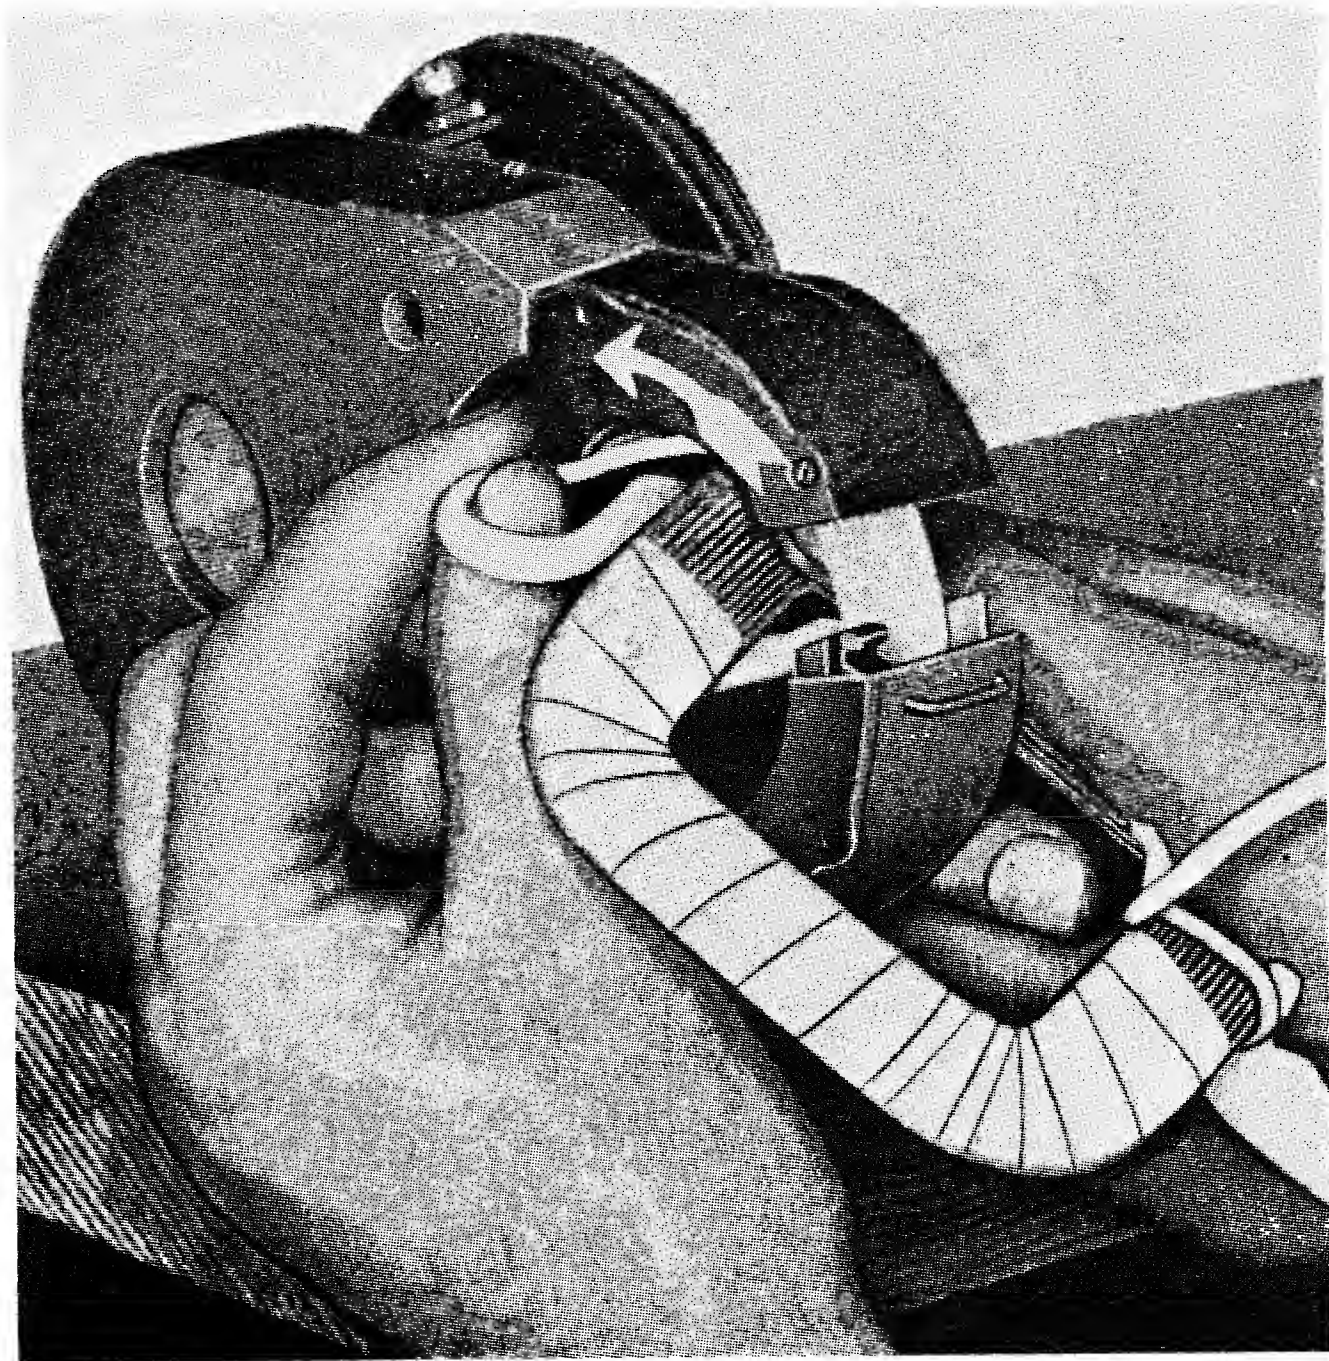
A loop-forming head for formed coils. (*Armature Coil Equipment, Inc.*)
